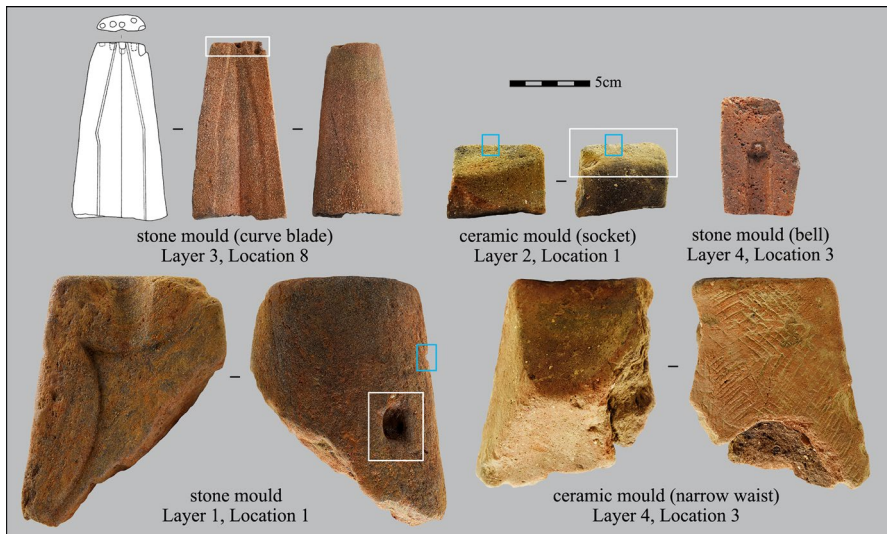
Moulds unearthed at LBH. The white frames mark the mould buckles and the blue frames mark the calibrating line; the relationship between the burnt mark and mould buckle can be observed on the back of the second mould
